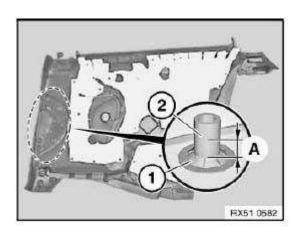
Identifying Welding Pins Measurement Courtesy of BMW OF NORTH AMERICA, INC.
